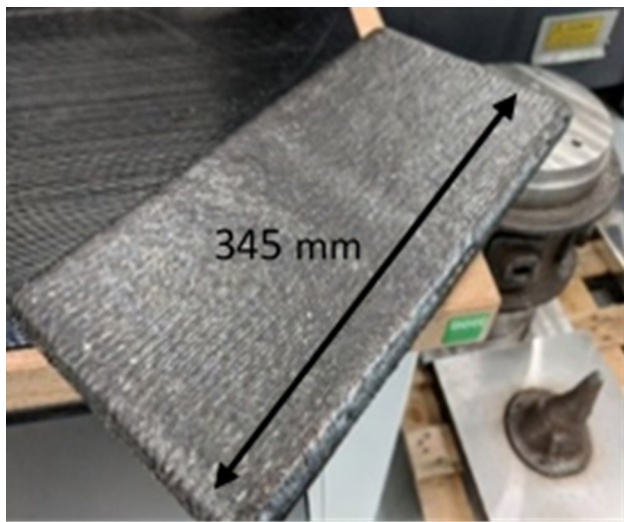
WAAM 3D printed steel sheet of thickness 20.5 mm.
